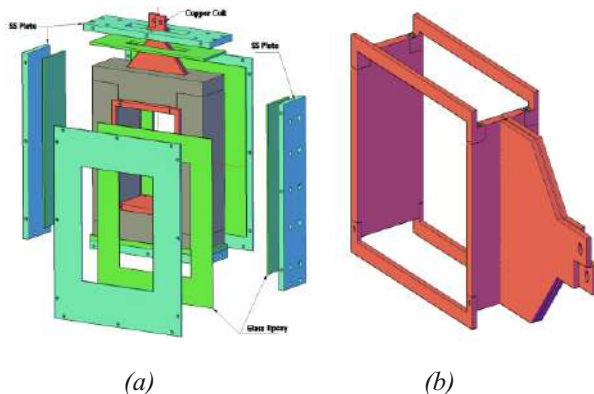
a) Assembly view of the magnet, b) Single turn excitation coil of the magnet.
